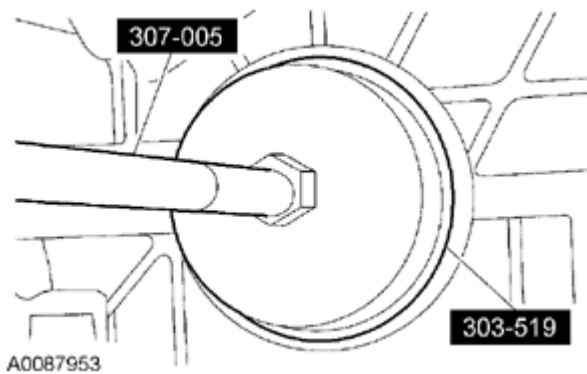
Removing Crankshaft Rear Oil Seal Using Slide Hammer And Crankshaft Rear Oil Seal Remover
